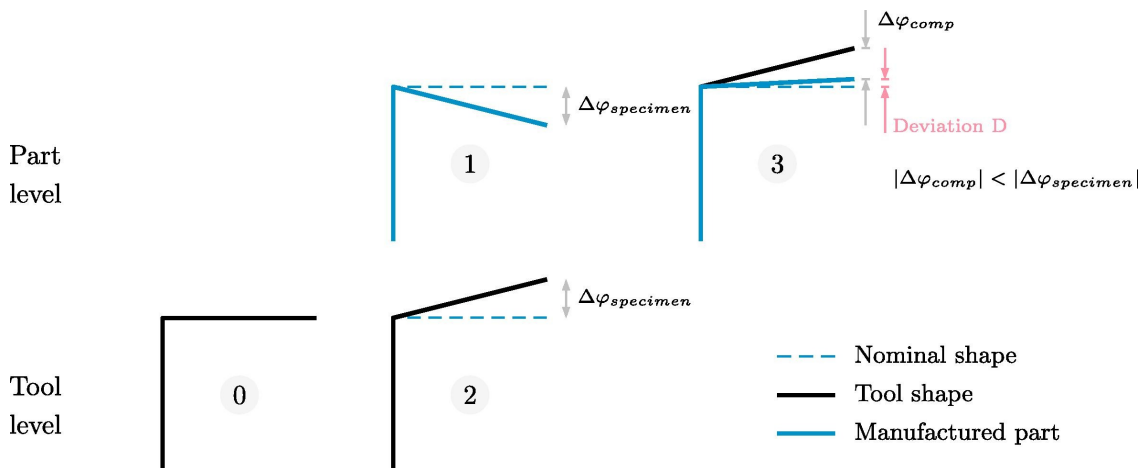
The tool compensation is a non-linear process. Step 0: Tool nominal geometry, Step 1: Distortion of a specimen manufactured from the nominal tool, Step 2: Linear tool compensation, Step 3: Deviation of the nominal to the actual compensated geometry [20].
